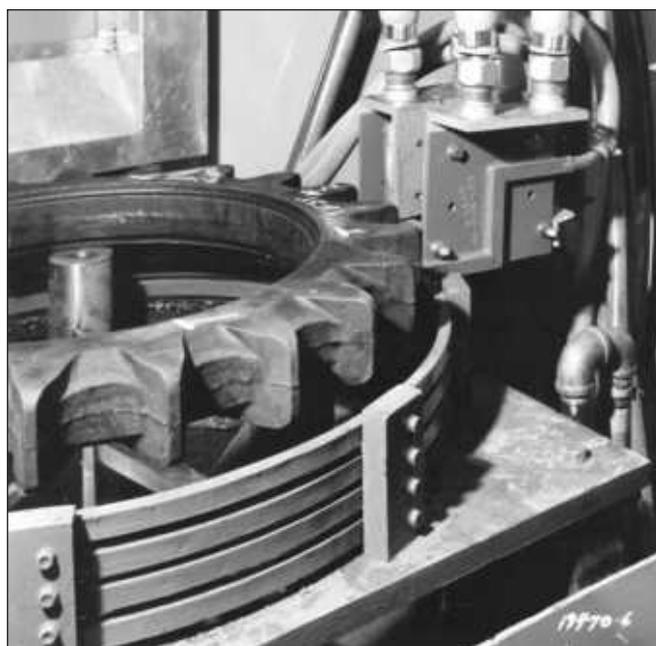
Induction equipment for hardening large gears. (Courtesy of Inductoheat Inc.).
